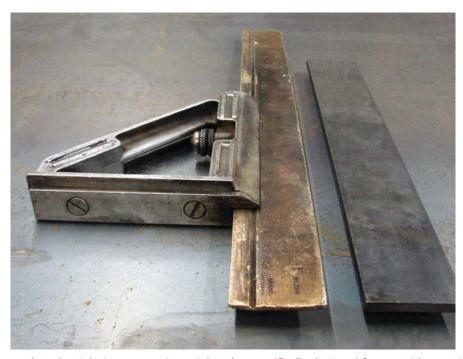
The tool on the right is a magnetic straight edge specifically designed for use with a cutting torch. It can be purchased in various lengths up to 8'-0". The magnets eliminate the need for clamping. The tool on the right is a home-made cutting guide constructed with $1/4" \times 2"$ flat bar. The top piece of bar is lifted up off the surface of the steel by welding a second piece of 1/4" bar to the bottom and offsetting it 1/2" from the edge. These can be made in any length, are re-usable, are more affordable, and are just as easy to use. The only disadvantage is the need for *C*-clamp locking pliers to hold the guide in place.
